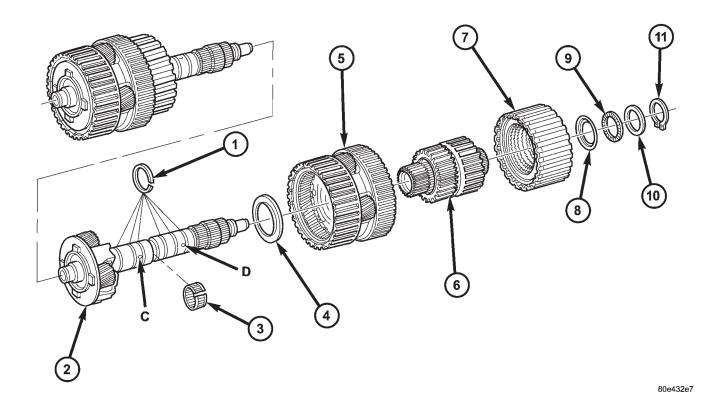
Output Shaft with Center and Rear Planetary Geartrain
